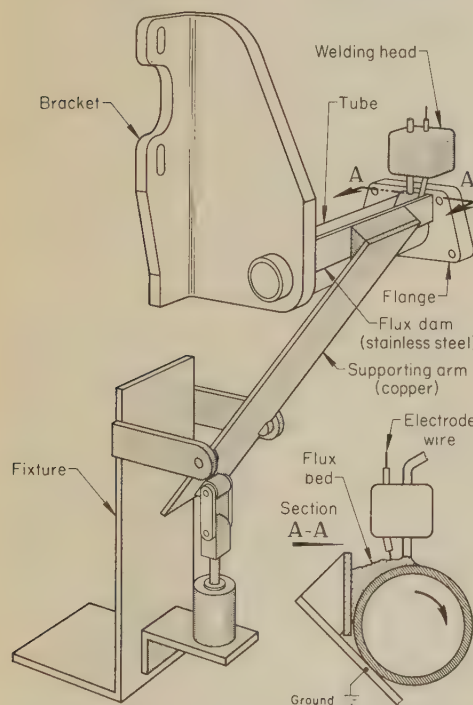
Flux dam used to retain flux during the simultaneous deposition of two circumferential submerged-arc welds on a rotating workpiece
